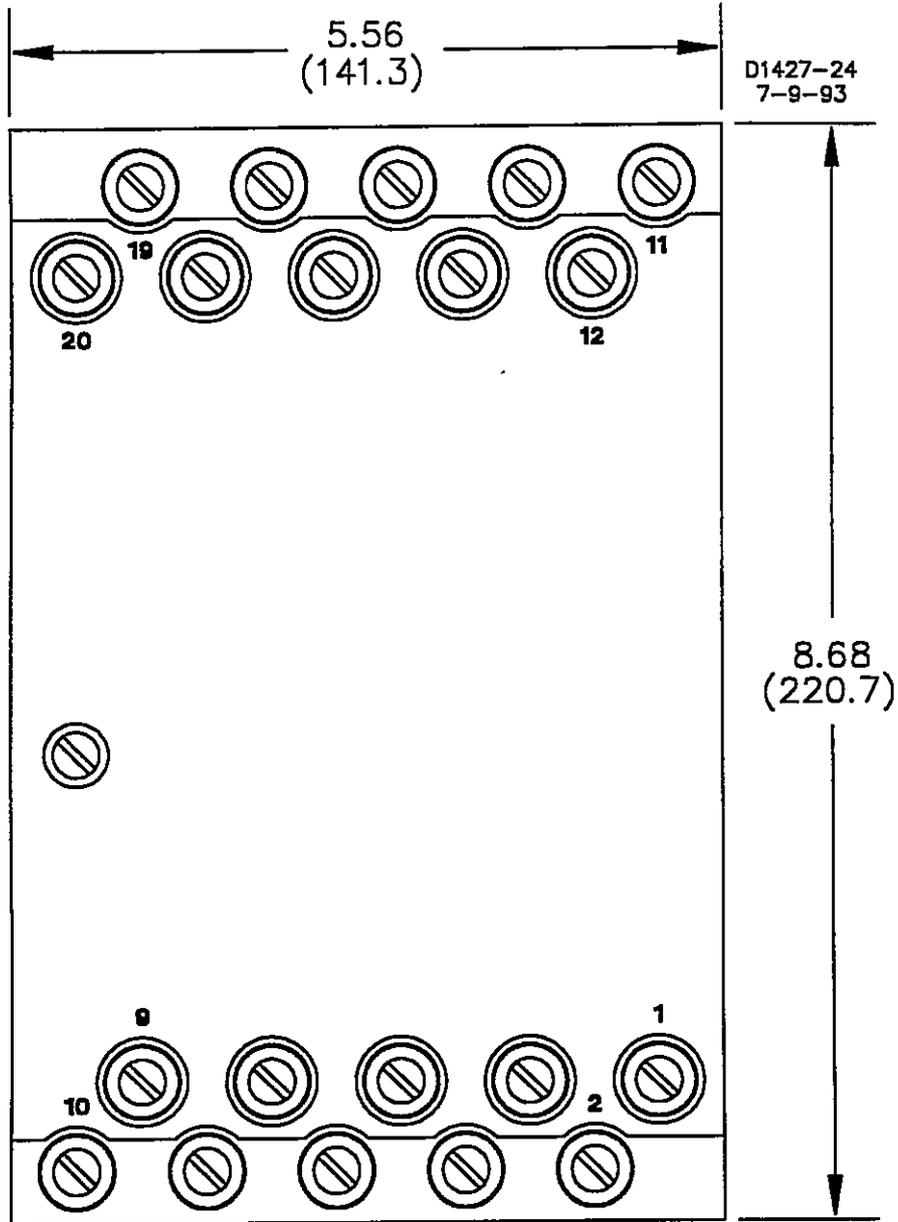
S1 Case, Double-Ended, Semi-Flush Mounting, Outline Dimensions, Rear View
